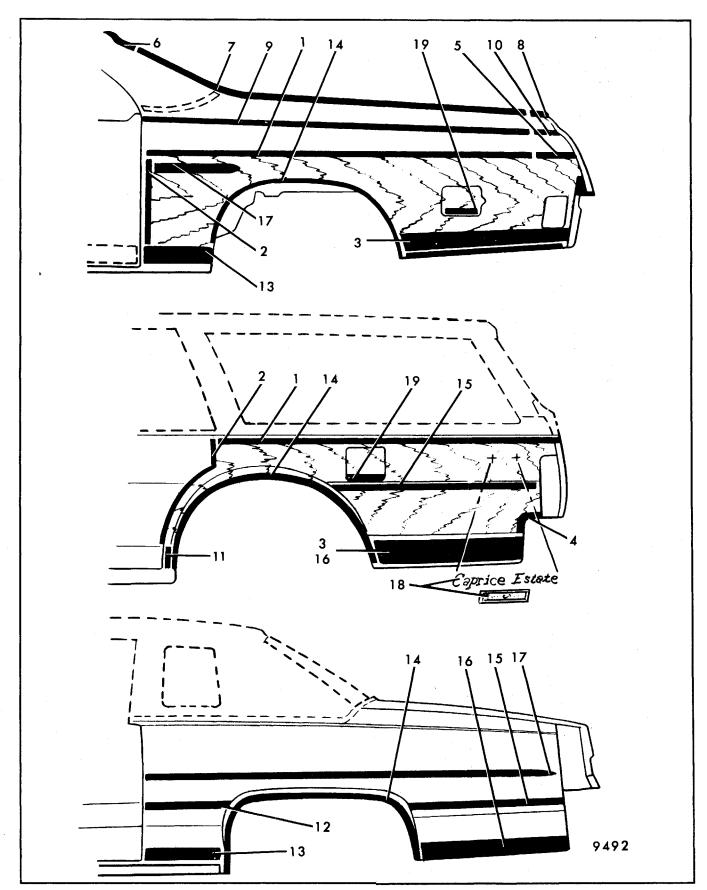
Typical Lower Quarter Exterior Moldings
